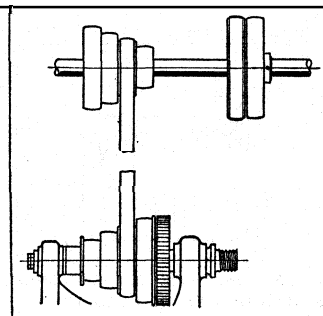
DIAGRAM SHOWING STEP PULLEY SYSTEM OF BELT DRIVE FOR AN ORDINARY LATHE
